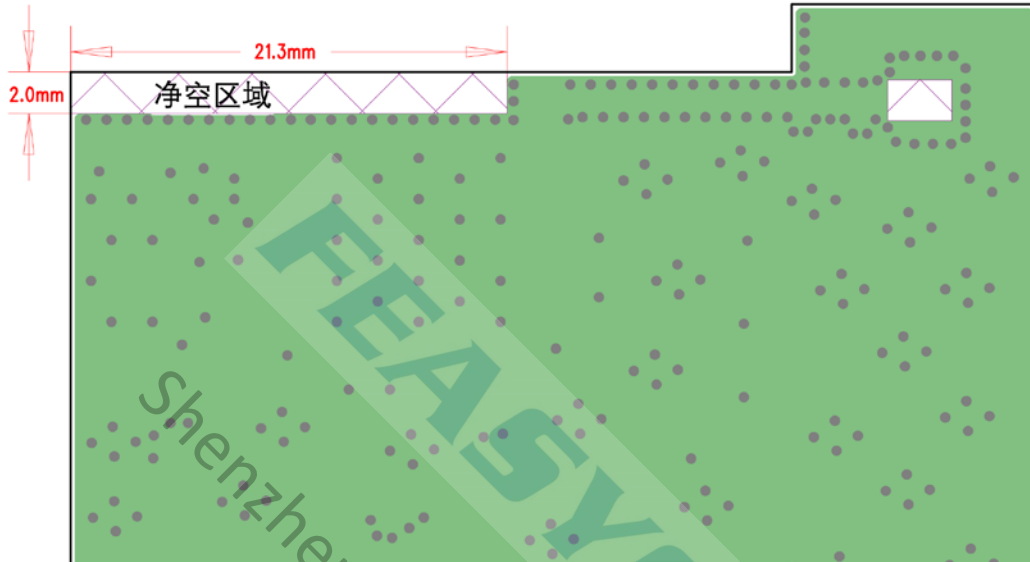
Module Layout - Main Board L2/L3/Ln...../BOTTOM Layers
